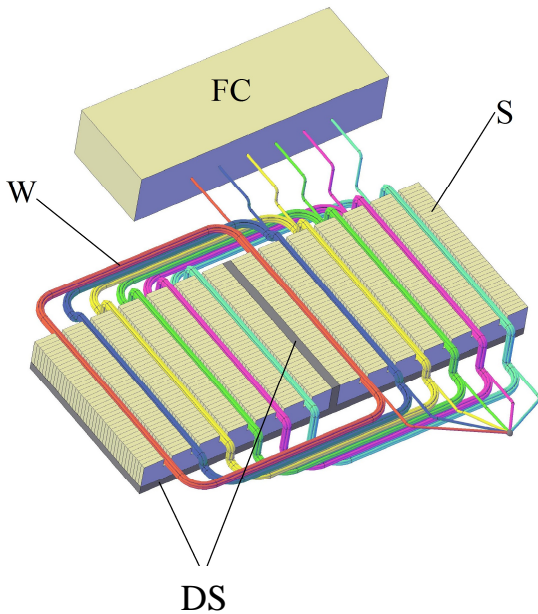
Design version of the stator of a 6-phase flat type AC linear motor and winding connections, where FC is a 6-phase frequency converter, S is the motor stator, W is phase multiple-turn winding of the motor stator, and DS is diamagnetic shield.
